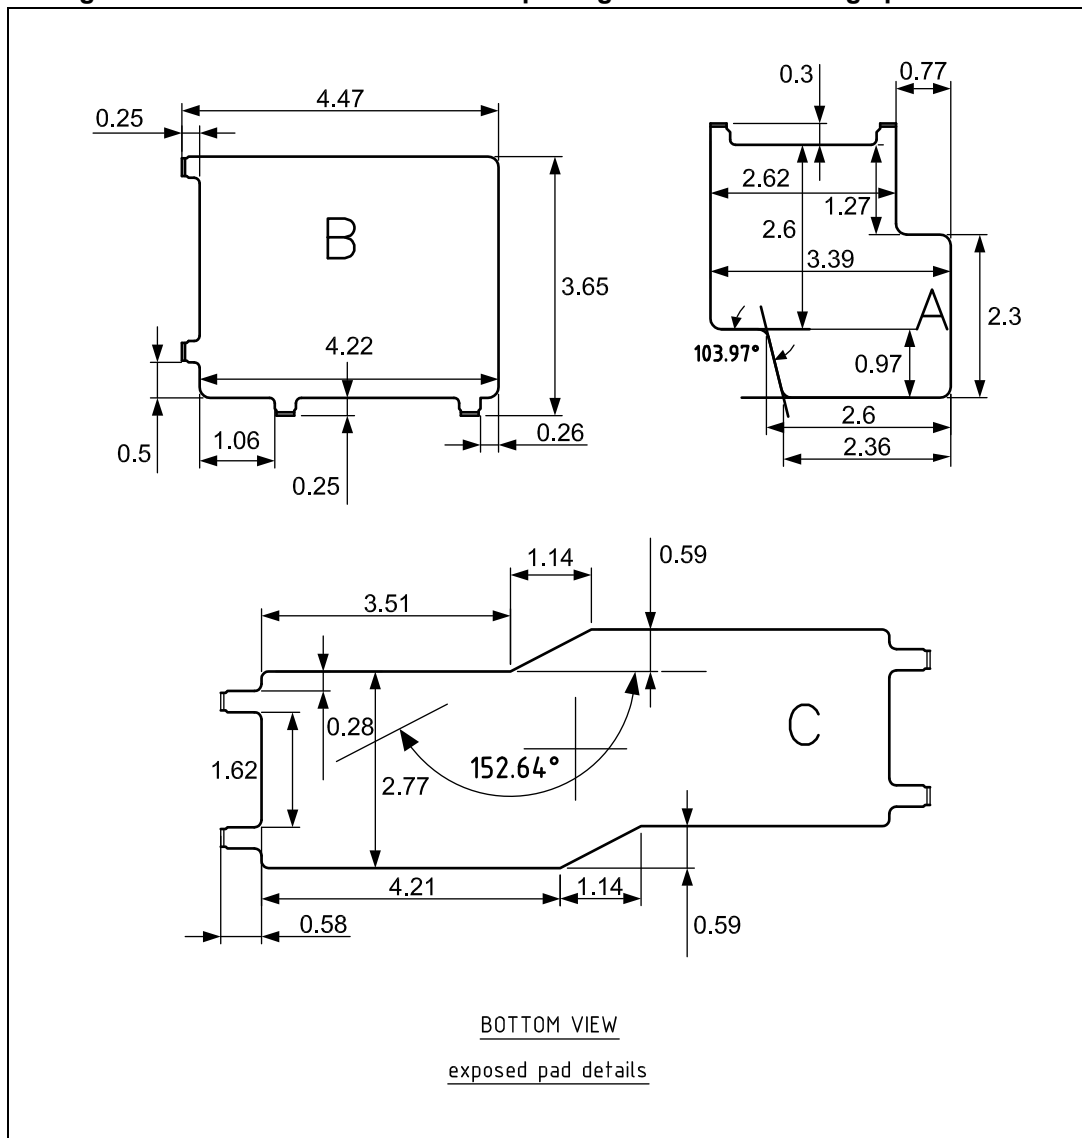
VFQFPN 10 x 13 x 1.0 mm package dimensions – large pads details
